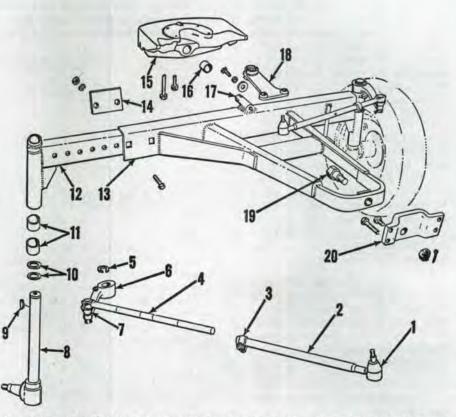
Exploded view of adjustable front axle assembly and associated parts. Center (main) member and radius rod (13) is a welded assembly.
